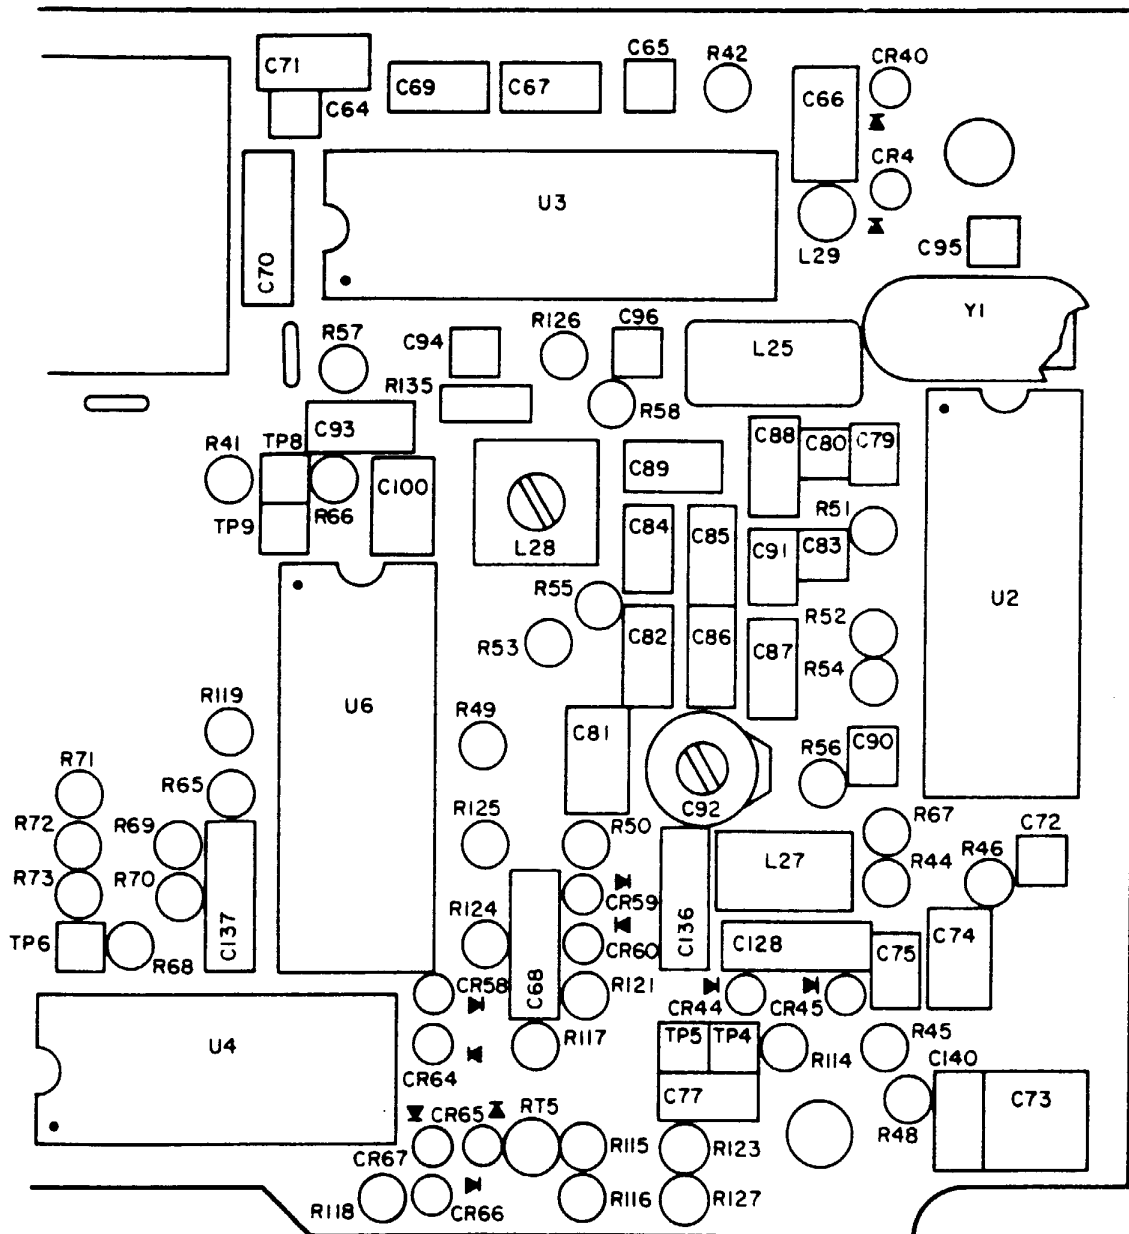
Main Receiver Assembly A1A1A4 Component and Test Point Location Diagram (Sheet 2 of 5)
